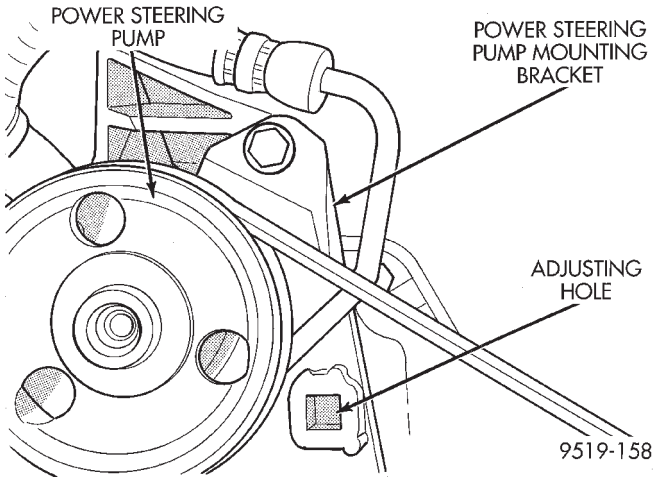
Power Steering Pump Front Mounting Bracket Adjusting Hole
